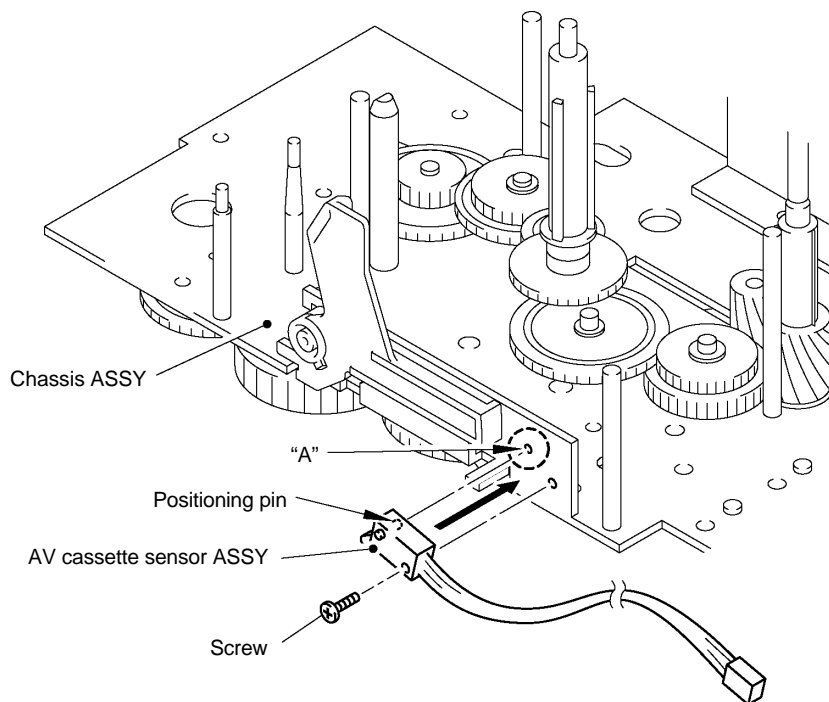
Reassembling the AV Sensor Actuator(2)
